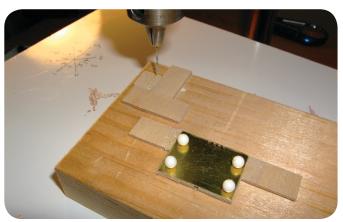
Brass jig placed over the seat black for drilling the seat back holes.
